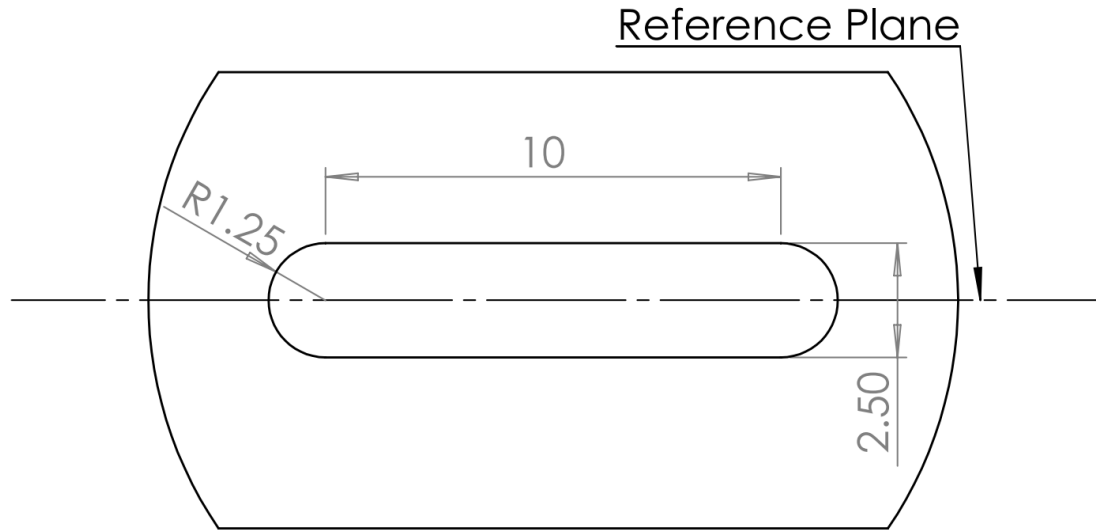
Obround WC nozzle prototype, top view showing powder injection hole
